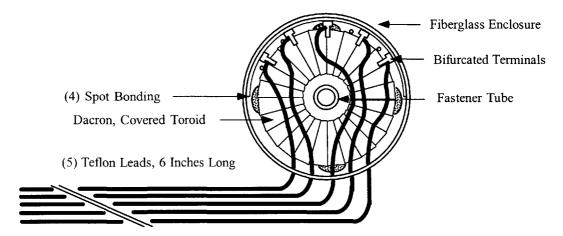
Transformer Top View of Assembly showing the Internal Construction.
